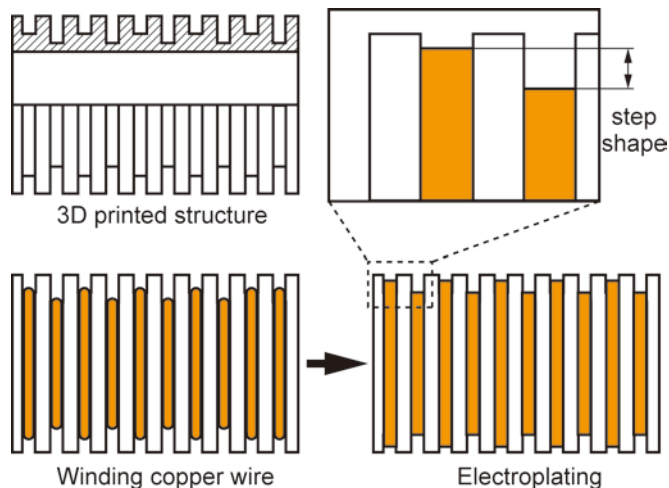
Concept of a step-shaped micro coil fabricated by 3D printing and electroplating.
